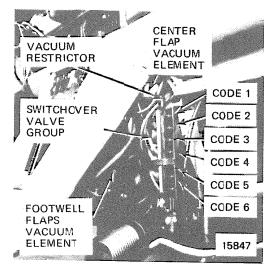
Ir Console, Behind Pushbutton Control Assembly
